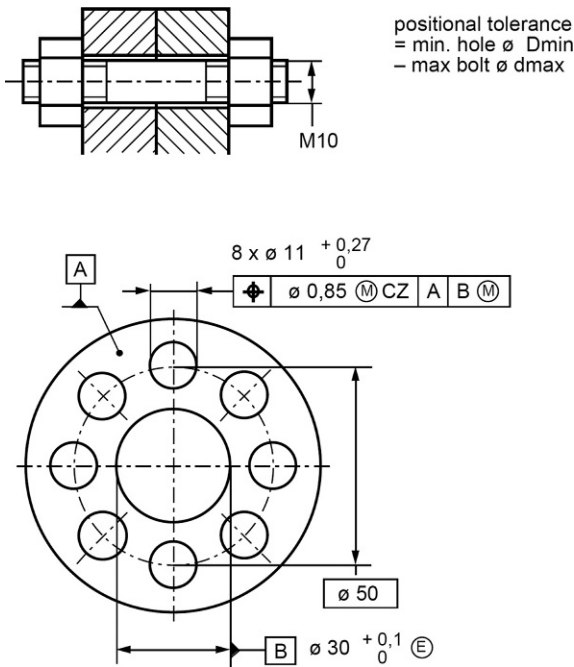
Through-holes for floating fasteners (bolts and nuts)
